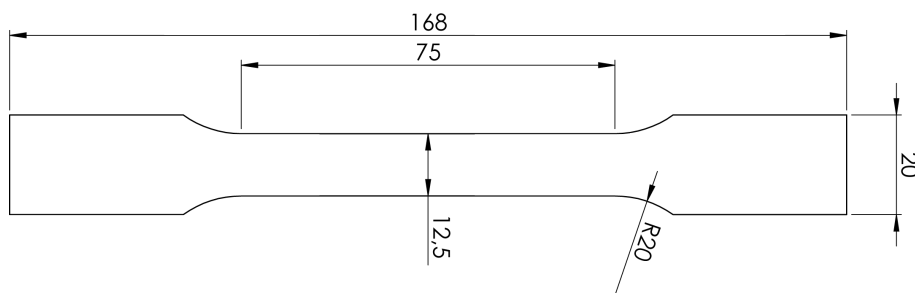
Drawing including detailed dimensions of the full scale tensile specimen. All values in mm.
